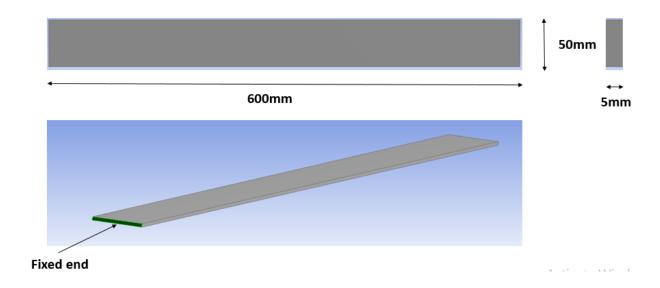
(a) Top view (b) side view (c) Isometric view
